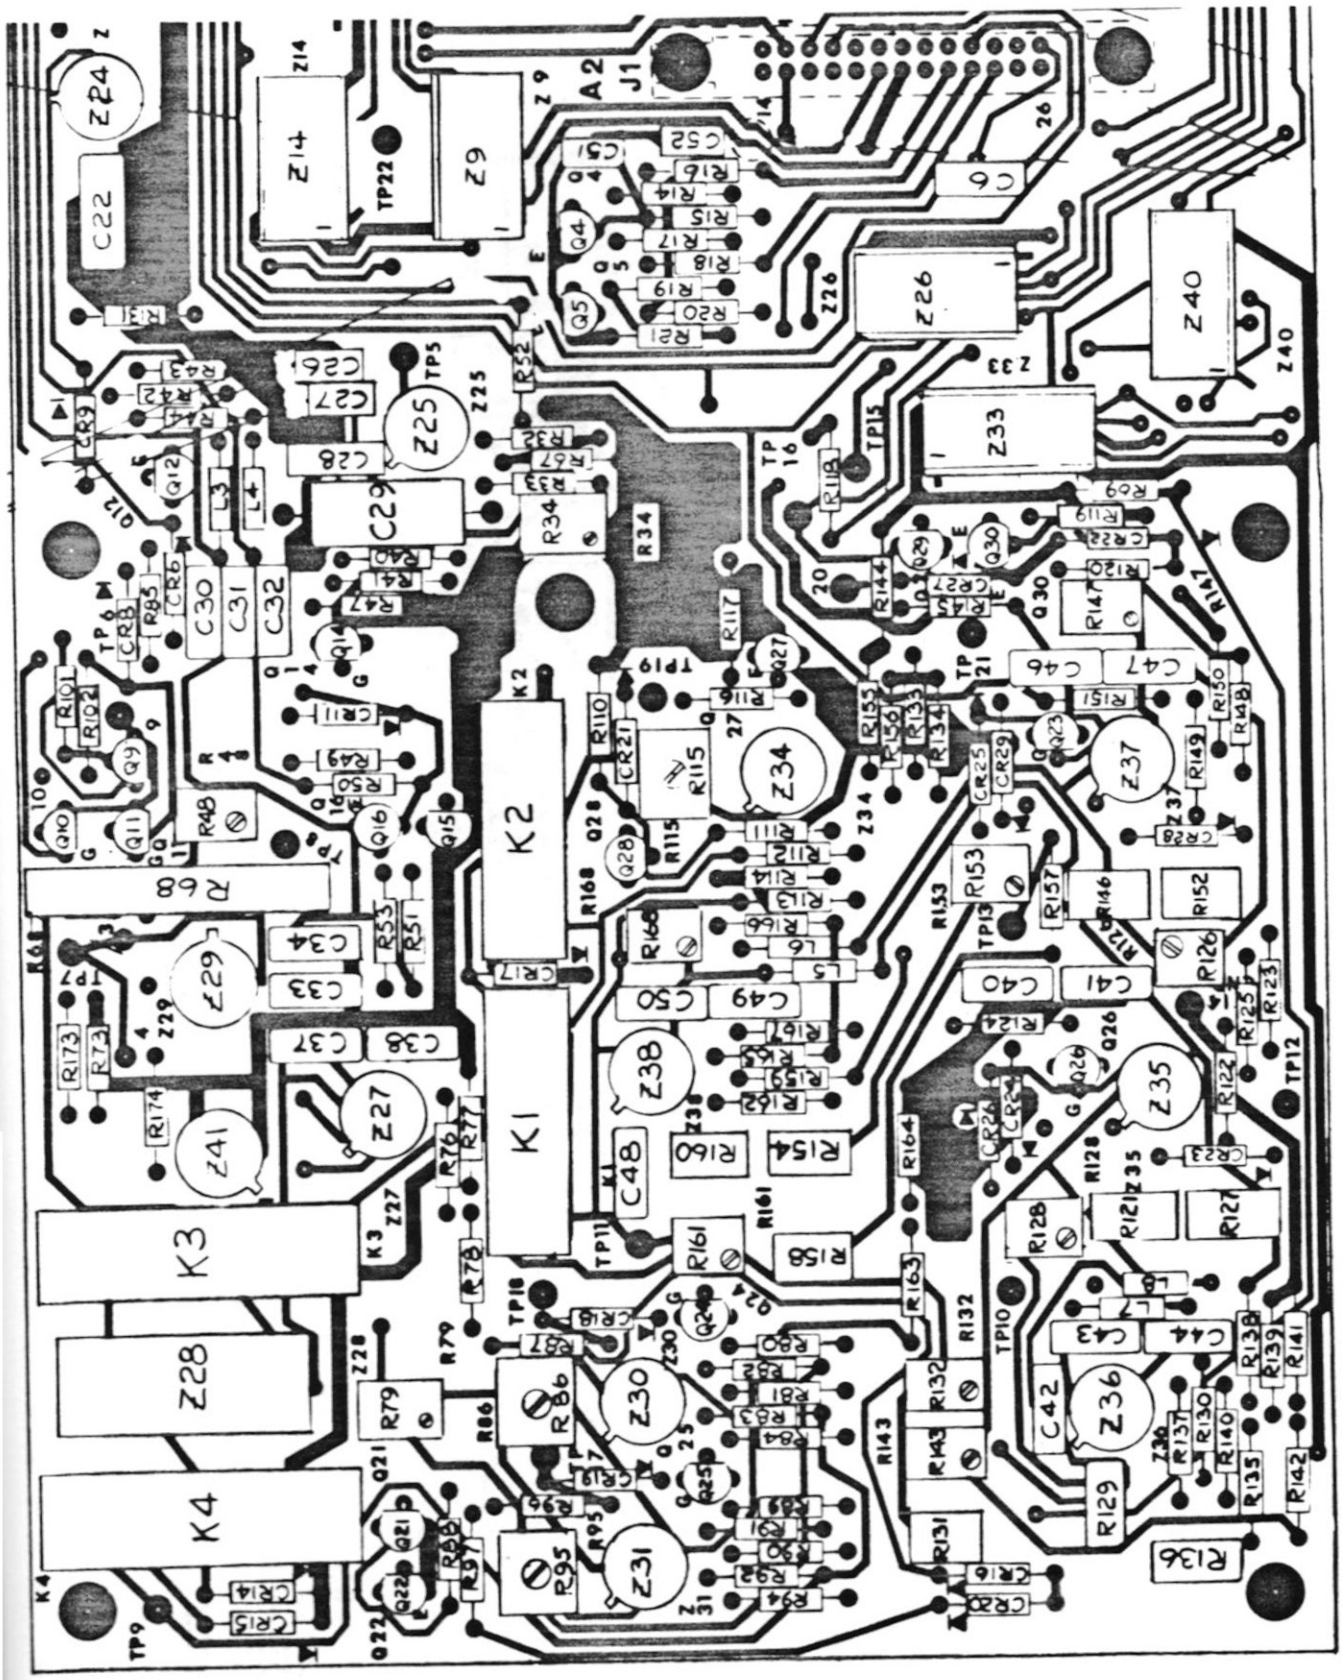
A/D Converter, Parts Locator (Sheet 1 of 2)
